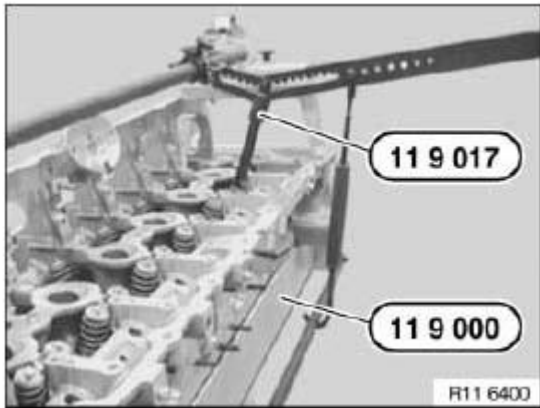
Identifying Special Tool (11 9 000) And (11 9 017)
